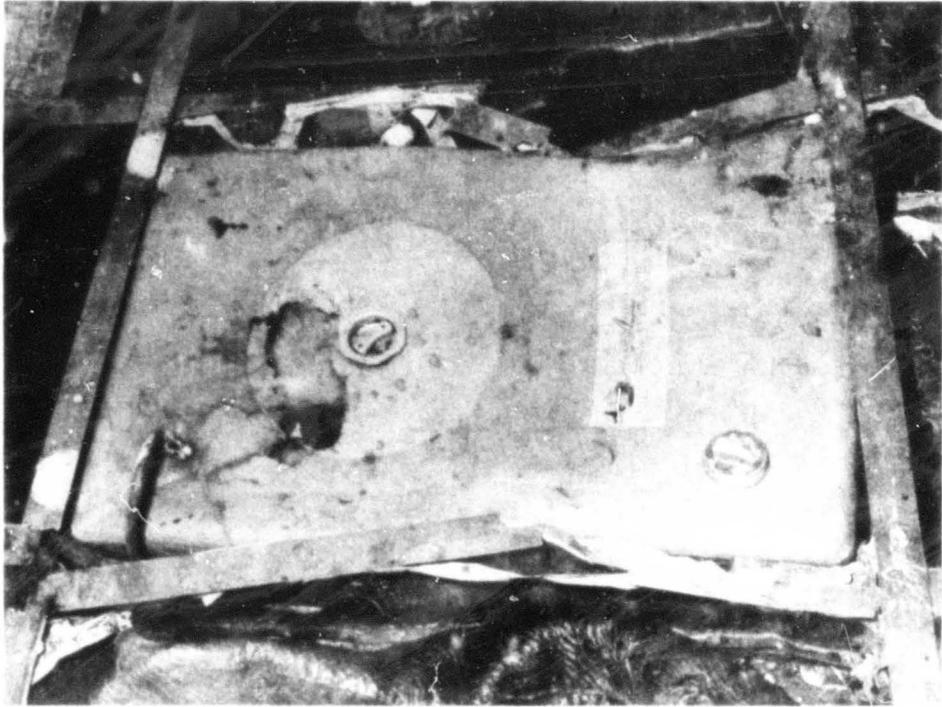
The Hollow "Tough Wall" Tank, T-23. (The Ruptured Tank in Location After Floor Removal.)
